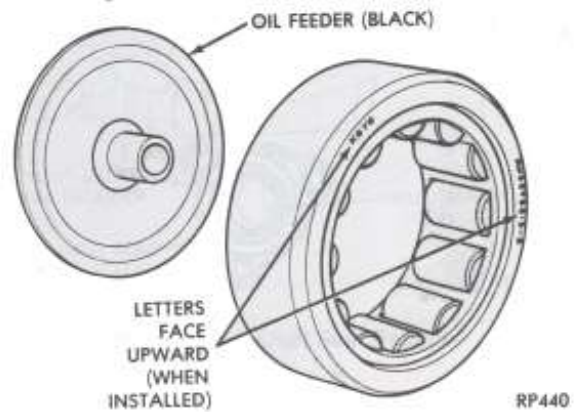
Bearing and Oil Feeder (A-520/A-555)
